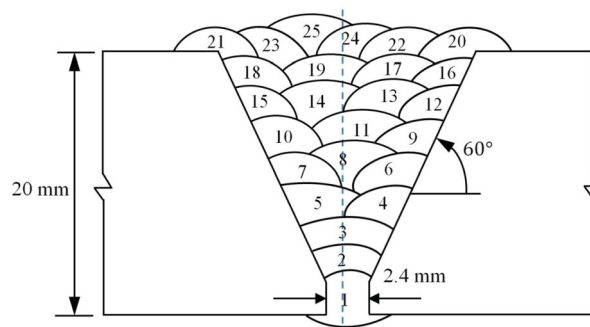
Weld deposition sequence in the welded specimens.
